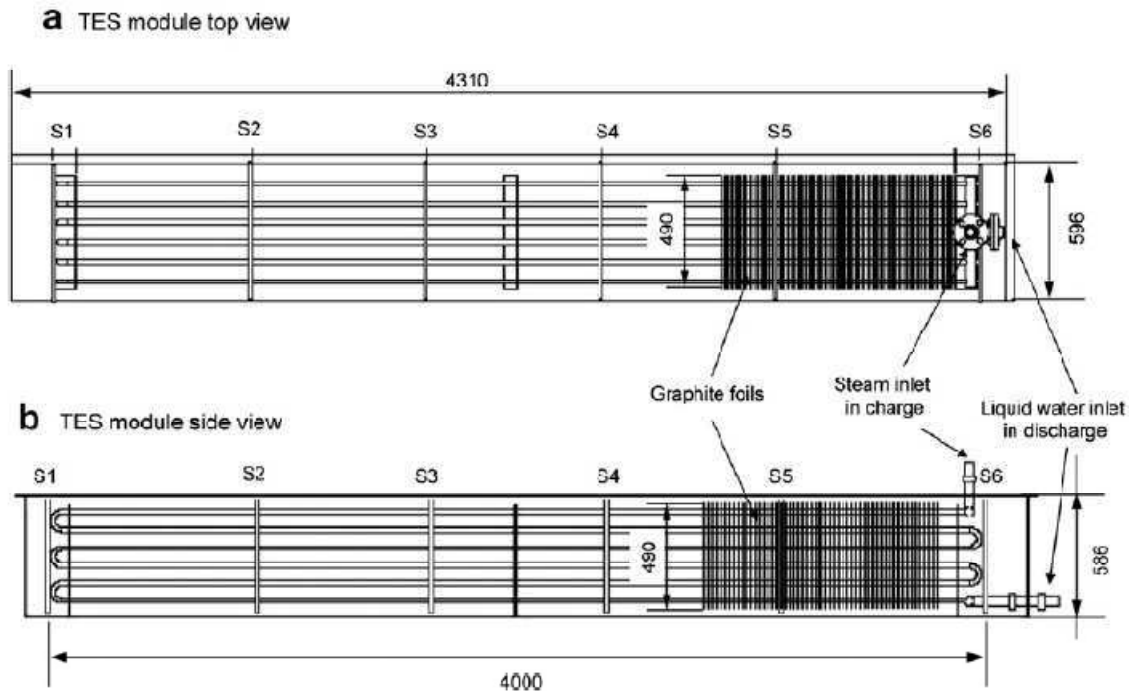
Sketch of the TES prototype with its dimensions (mm) [26]
